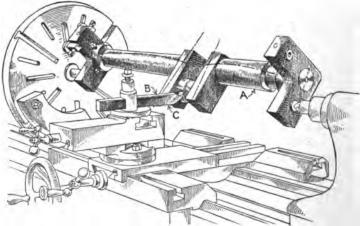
ALL KINDS OF SPRING IN WORK FIXTURES AND CUTTING TOOL (110)
